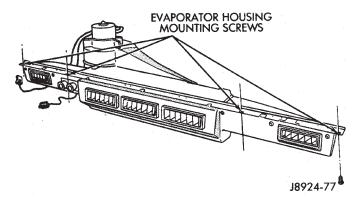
A/C Evaporator Housing—YJ Vehicles
